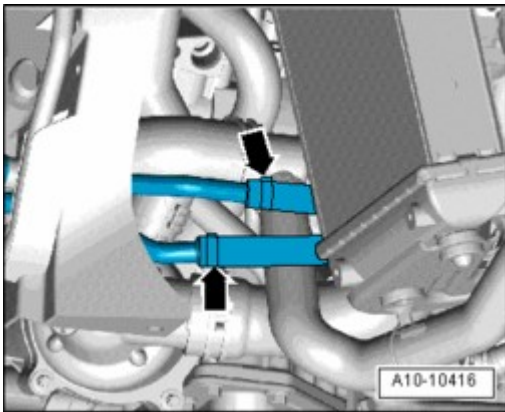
Disconnecting Hydraulic Lines To Cooling Coil At Left Rear Of Bumper
